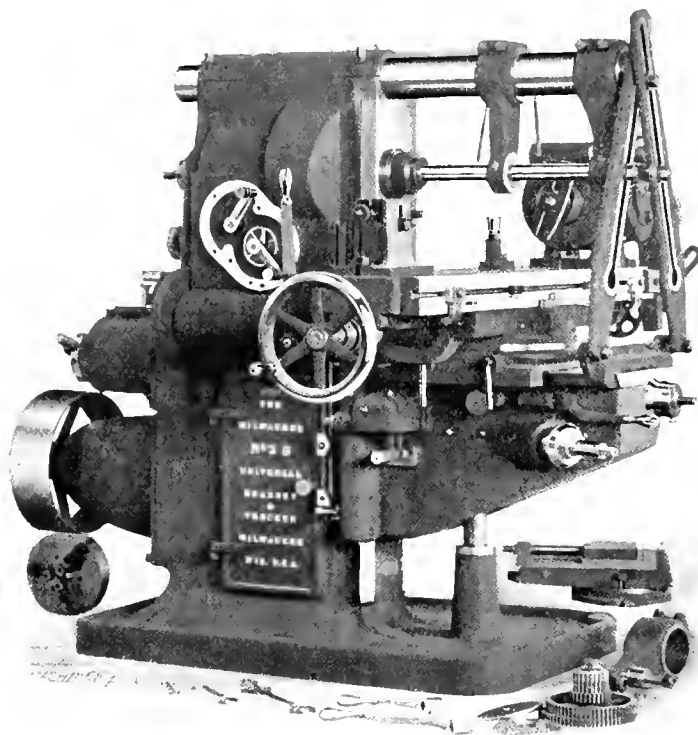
Front View of Kearney & Trecker No. 3 B Universal Milling Machine.
